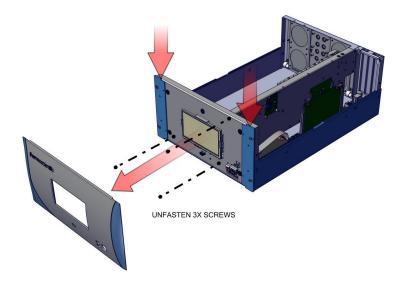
Unfasten Hardware Front for Measurement Side Removal
